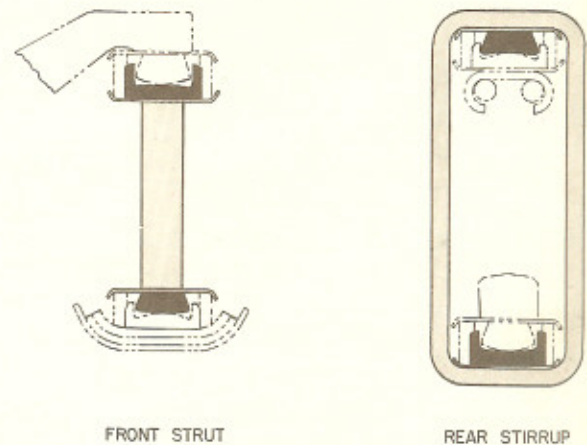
Cross Section of Front Strut and Rear Stirrup
